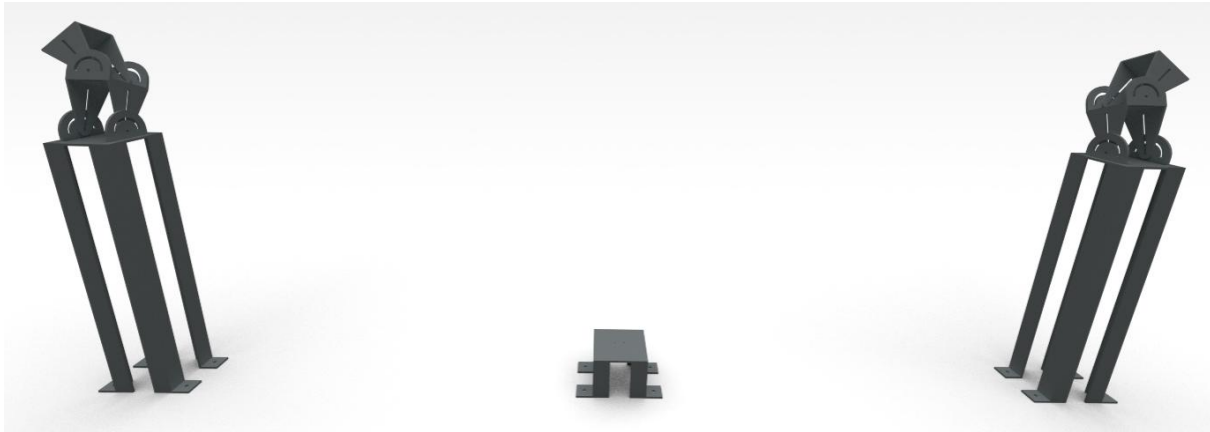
The camera fixture CAD models for the plug installation inspection system. From: the author (2026)
